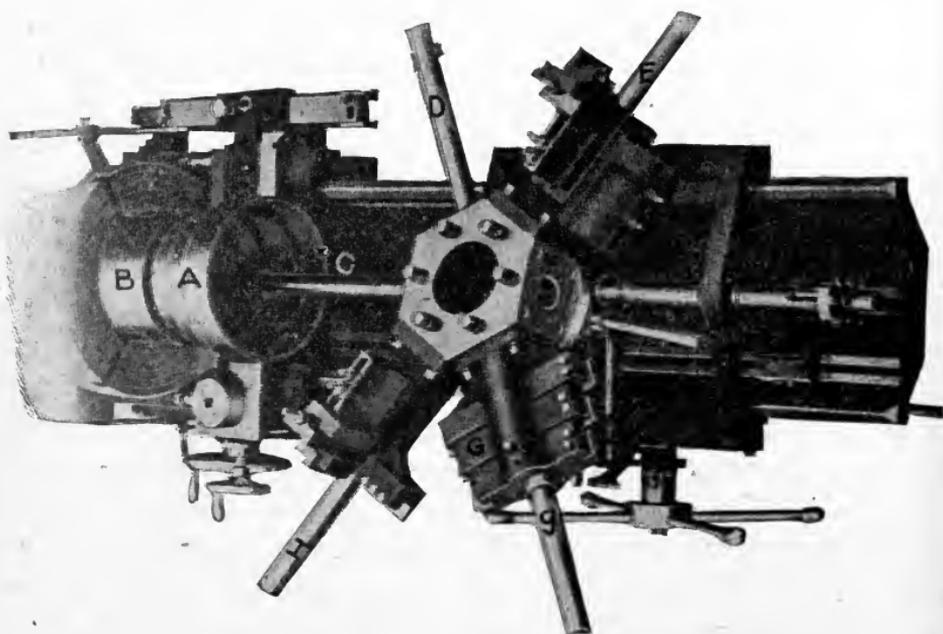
Arrangement for Machining Inside of Cone Pulley
